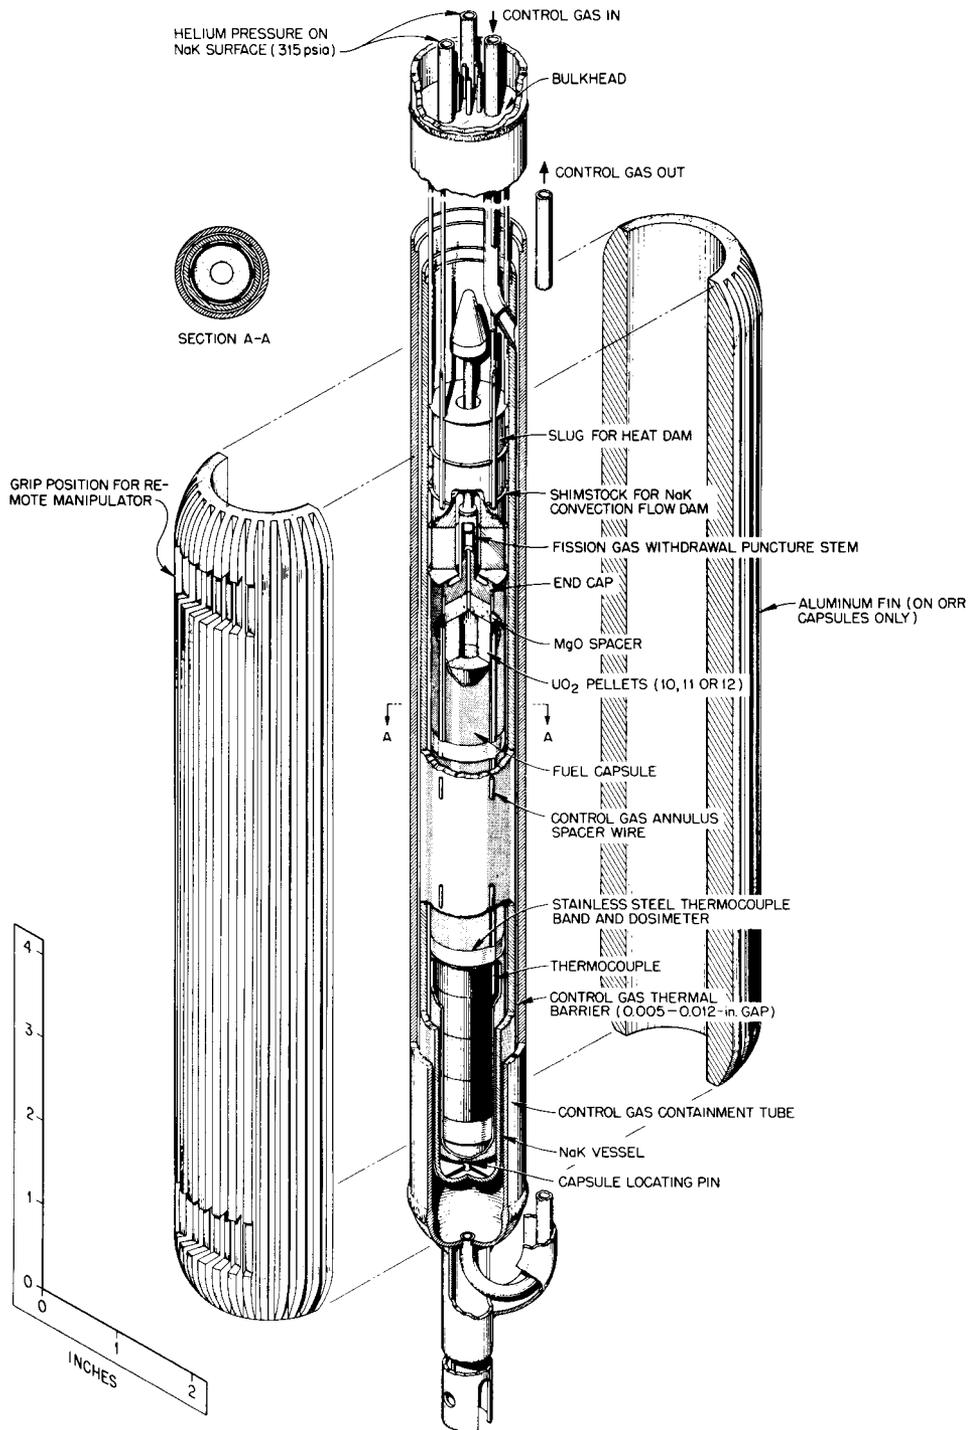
EGCR Prototype Diameter Fuel Capsule for Irradiation in ORR and ETR.
